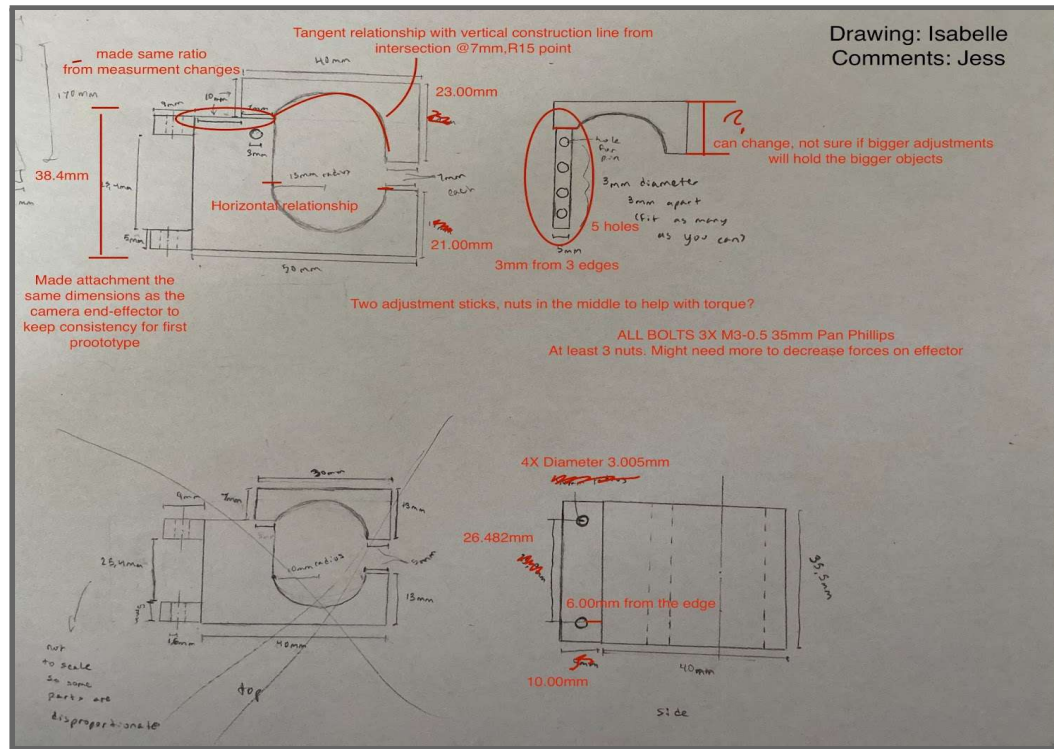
First engineering drawing of corrosion remover and painting end effector with comments during CAD modelling
